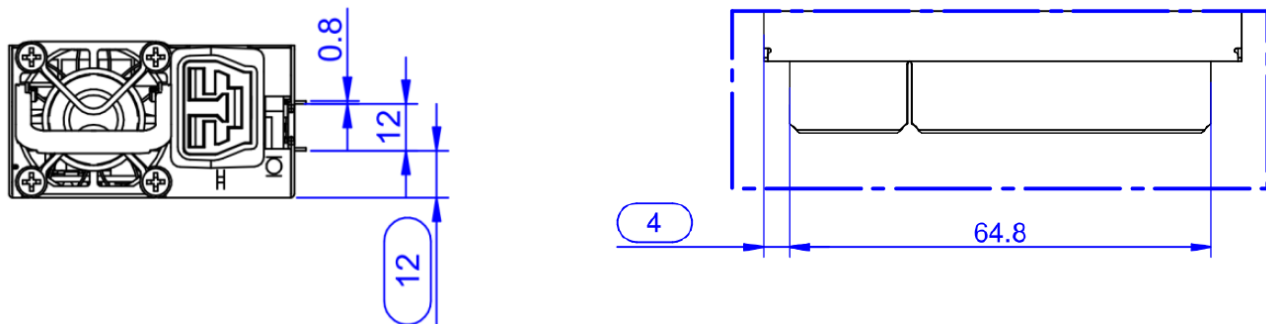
PSU front view (left), detail A of PSU edge connector (right)
